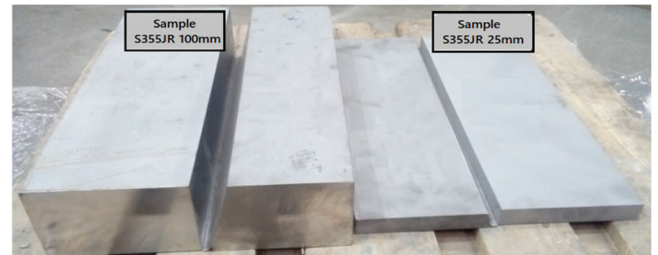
Preparation of elements for submerged arc welding test
